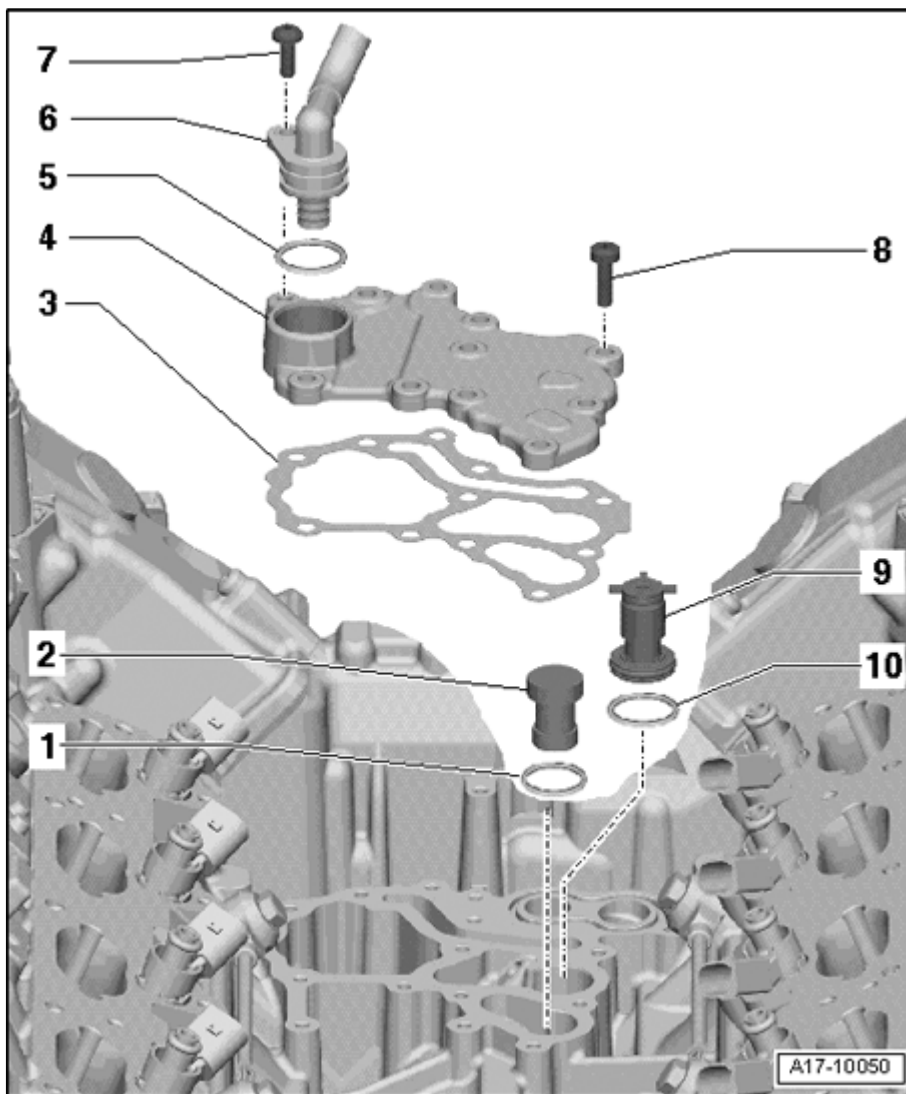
Oil Check Valve And Spray Nozzle Valve, Assembly Overview
